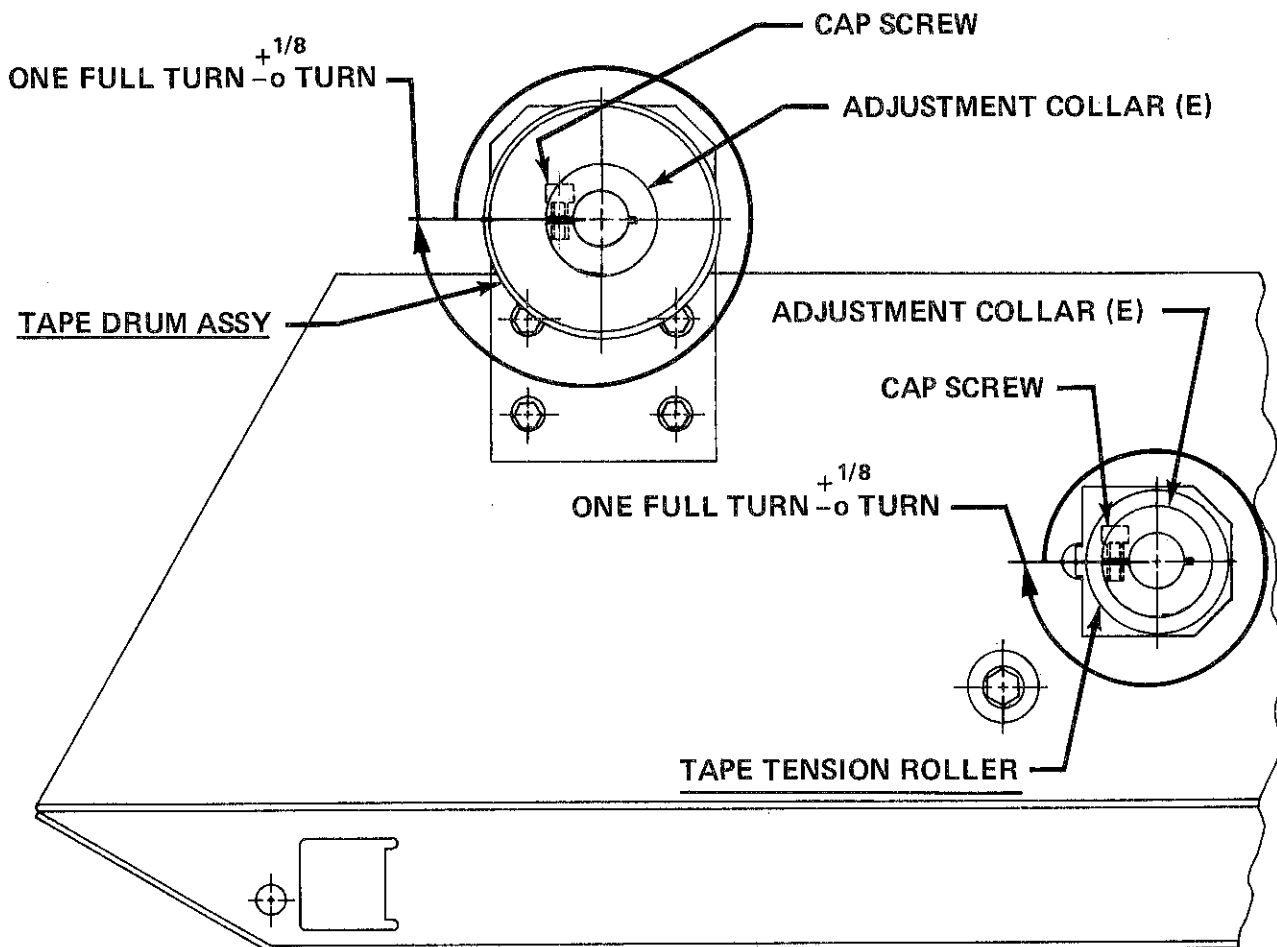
TAPE TENSION ADJUSTMENT - RIGHT SIDE VIEW UPPER HEAD
